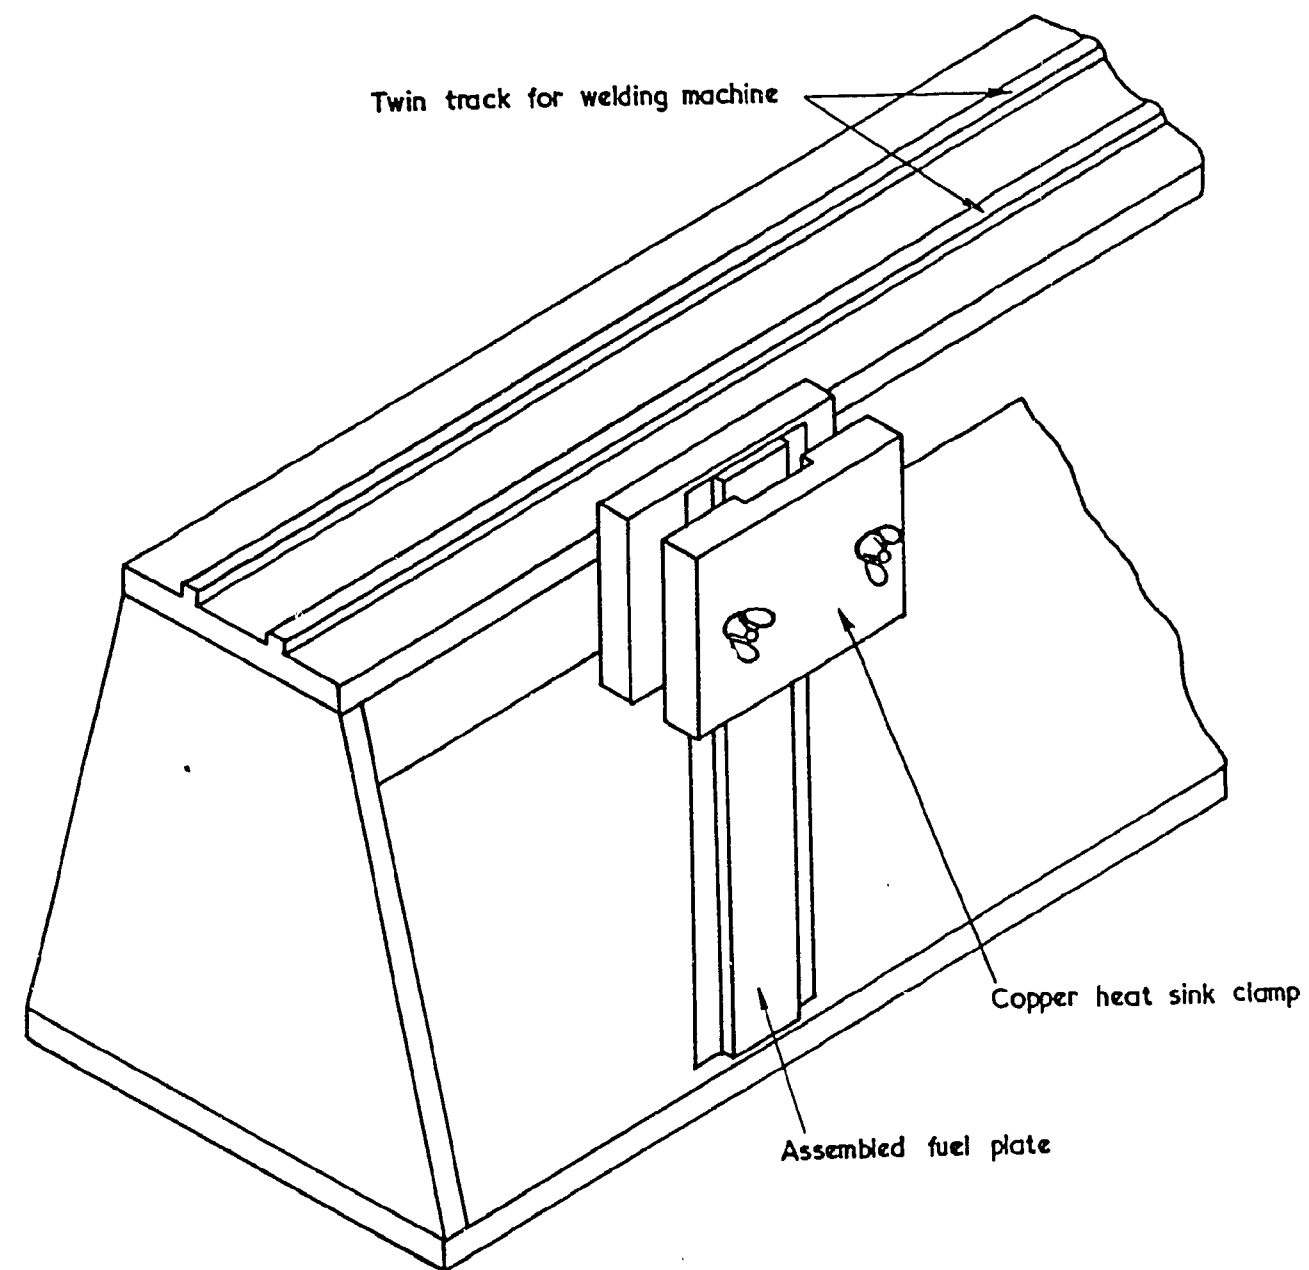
JIG FOR END-WELDING OF FUEL PLATE
